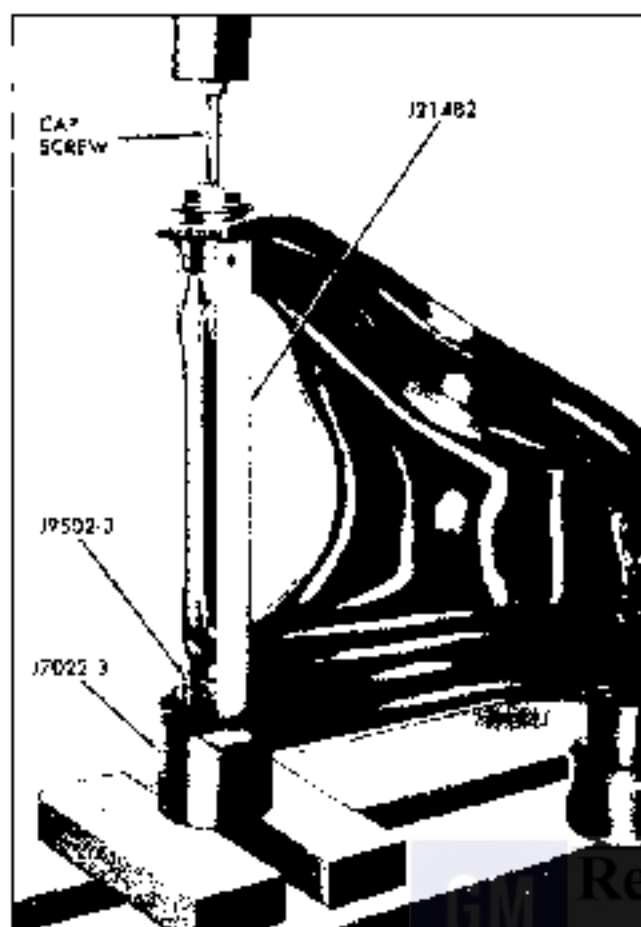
Removing Upper Control Arm Bushing (Firebird)
